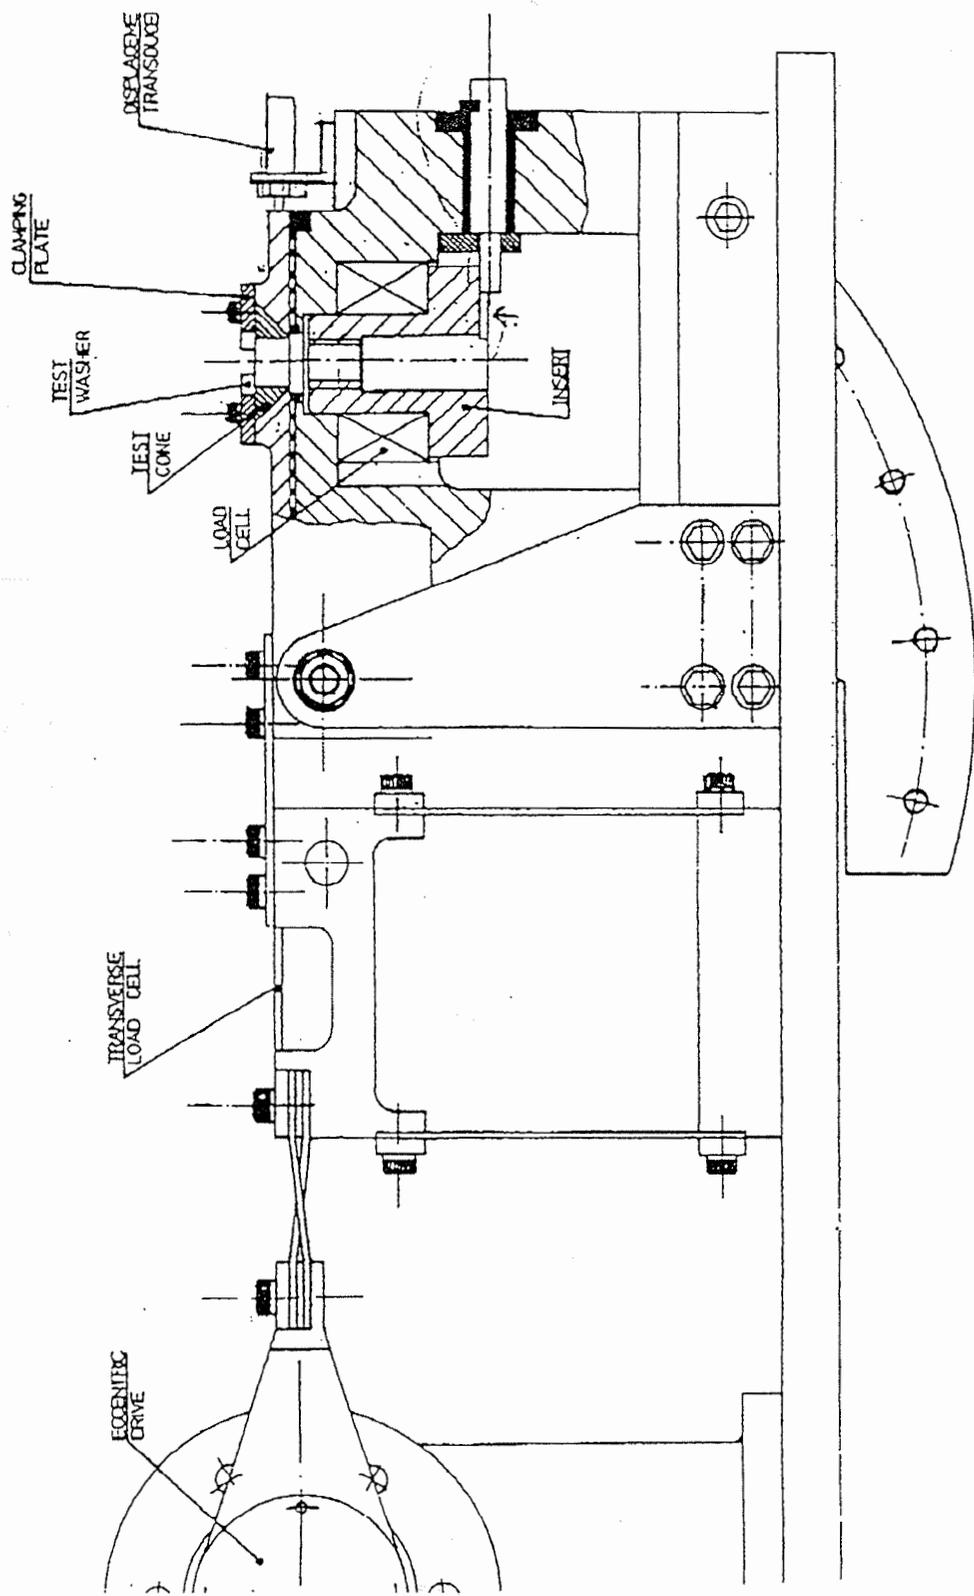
Junker Transverse Vibration Test Machine used by Huck Bolt Tech Center.
